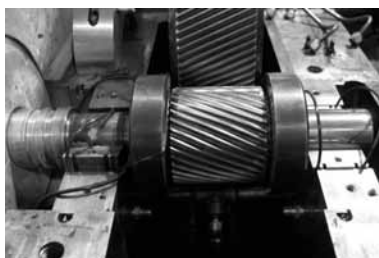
Protective sleeves of shafts coated with M4 (316) TS AWS
